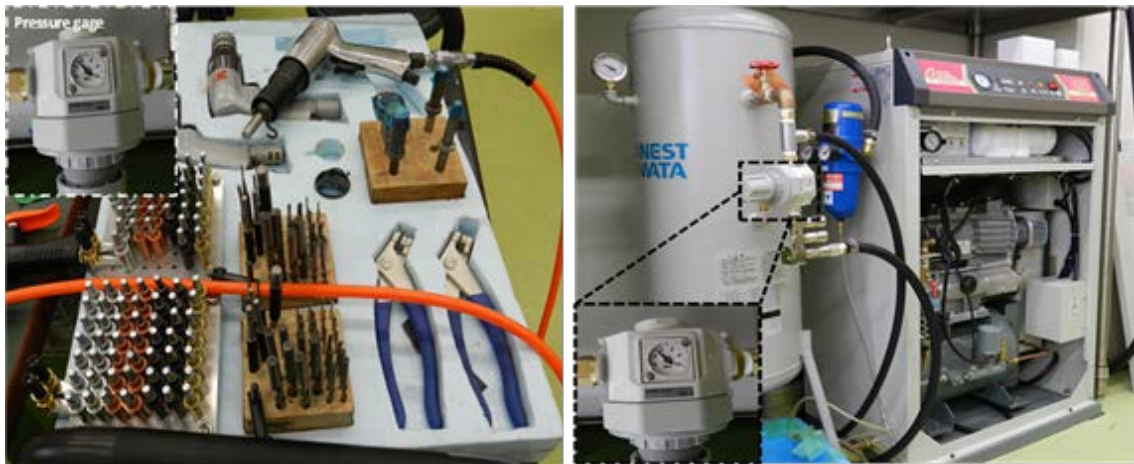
Rivet assemblies equipment and the compressor system for rivet gun.
